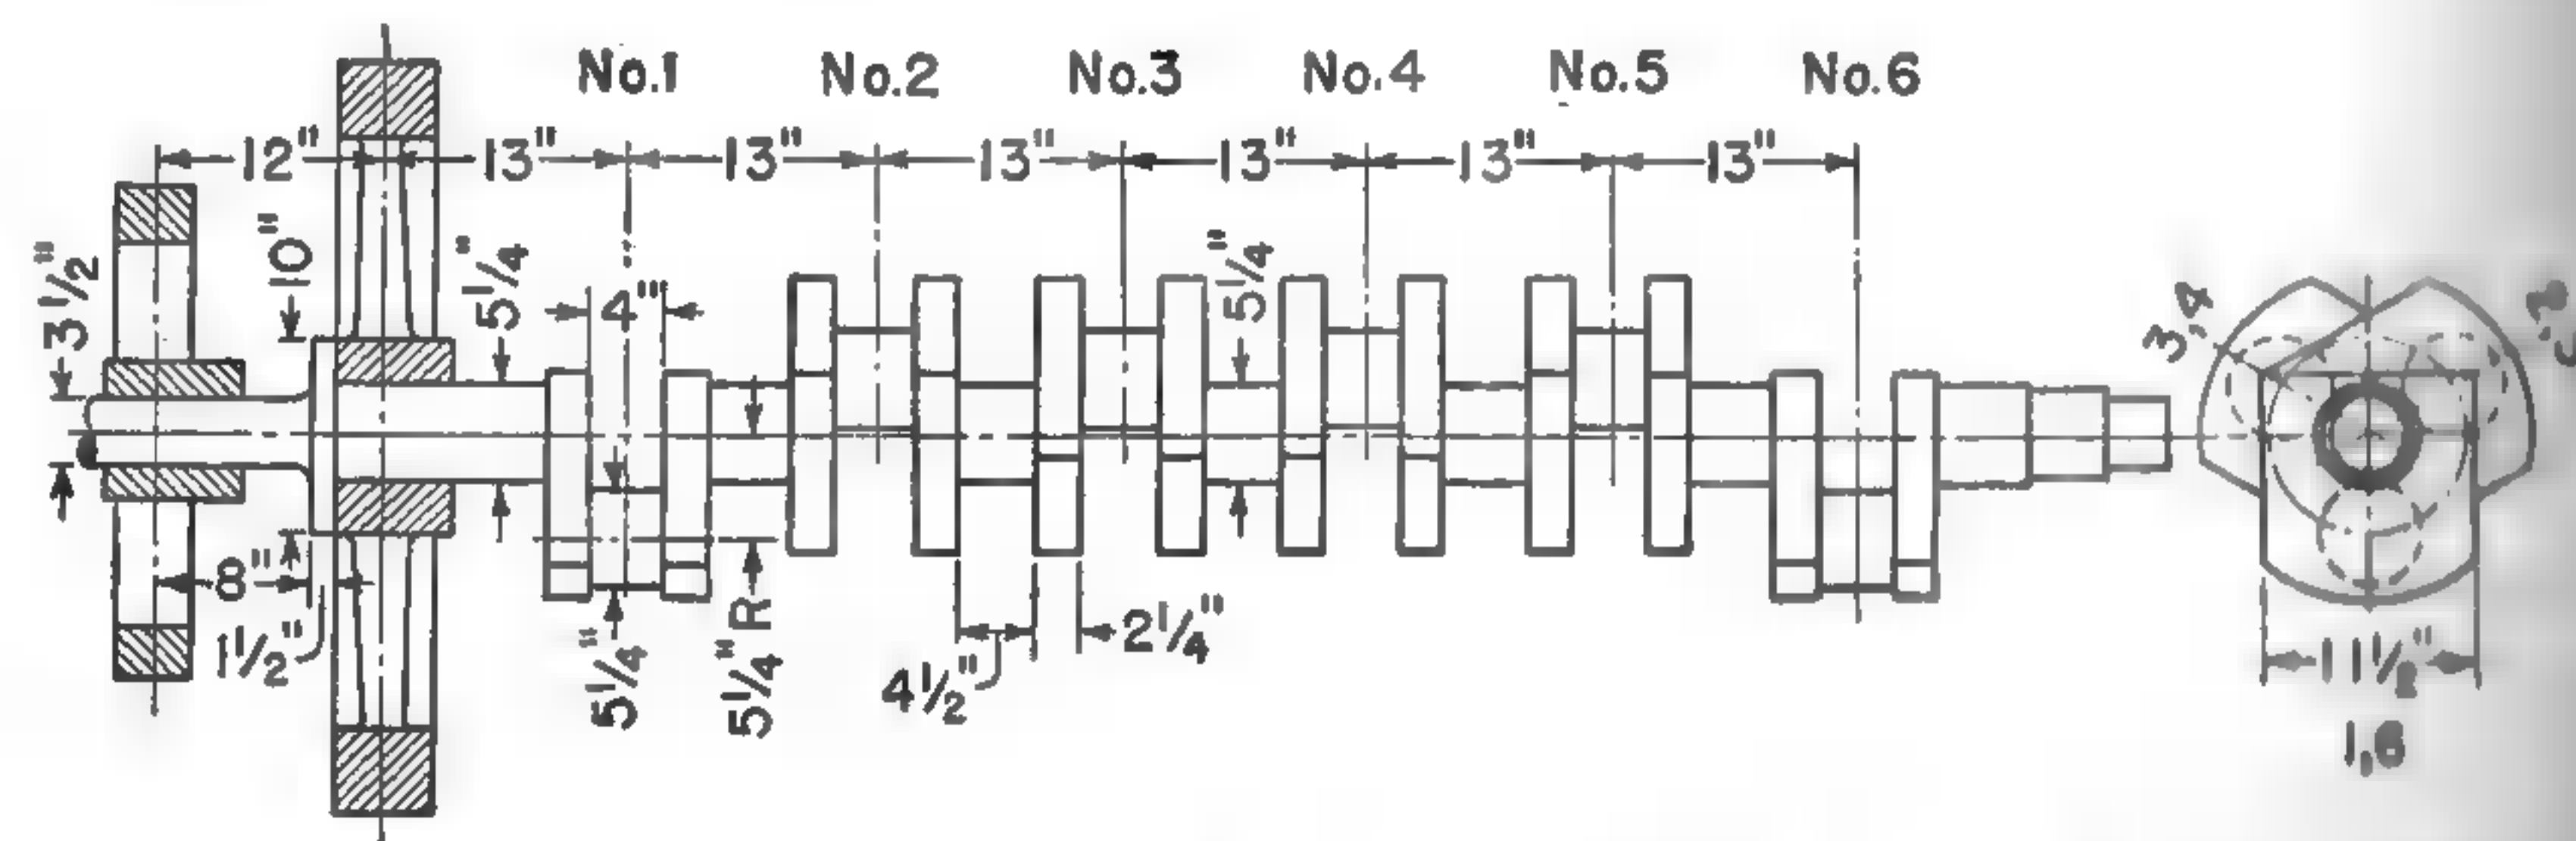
Crankshaft for six-cylinder oil engine.
